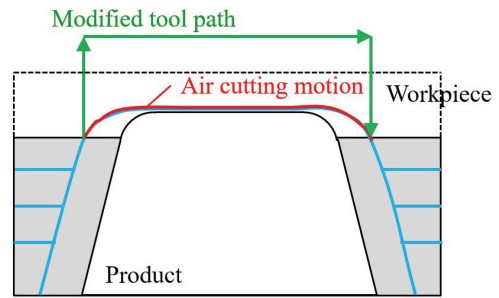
Modified tool path to avoid air cutting motion for improvement of machining efficiency.
